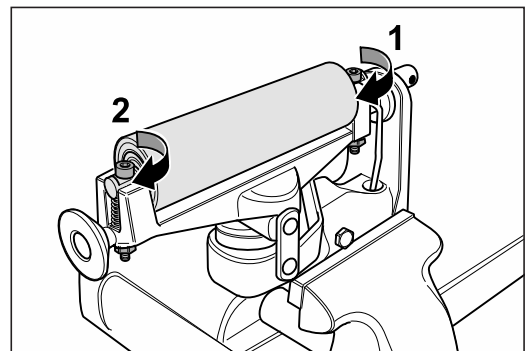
Tighten the side without spring (1) and then the side with spring (2), so that ...
